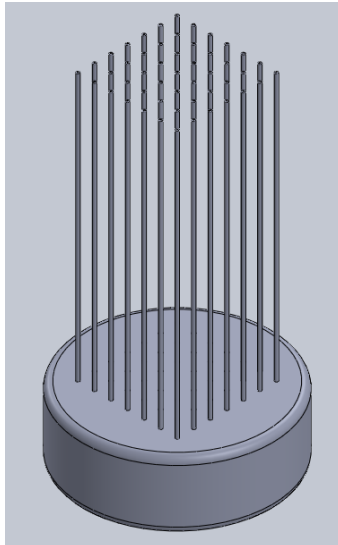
Custom, 2cm long needle array attached to cell suspension reservoir. The design would be fabricated as one entire piece.
